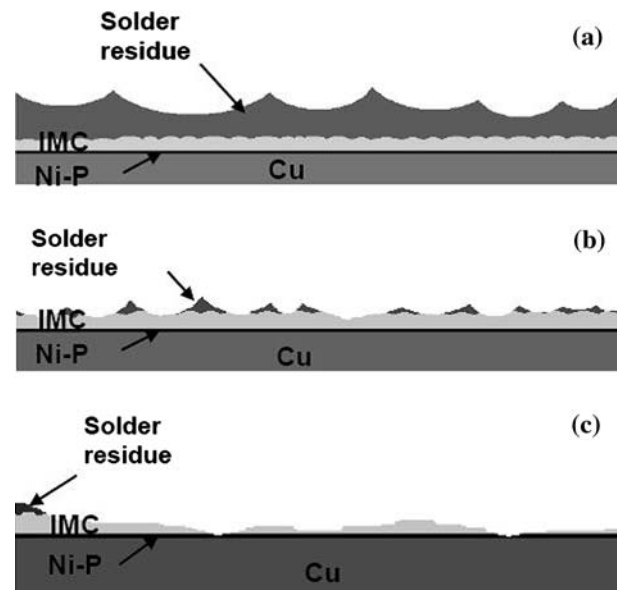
Schematic illustration of the fractured solder joints in three different modes: (a) solder mode, (b) mixed solder/IMC mode, and (c) IMC mode joint.
